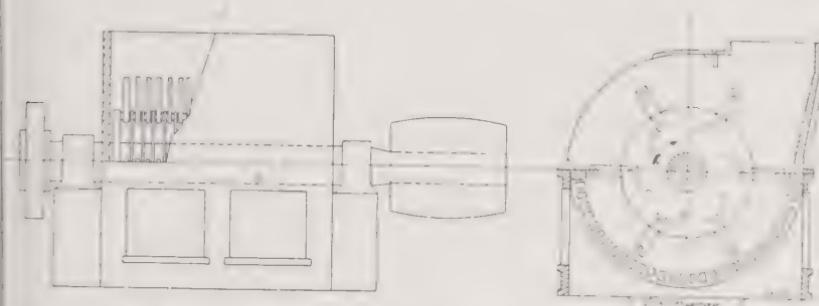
The Jeffrey crusher, illustrating the rotary hammer mill type of disintegrating device.
